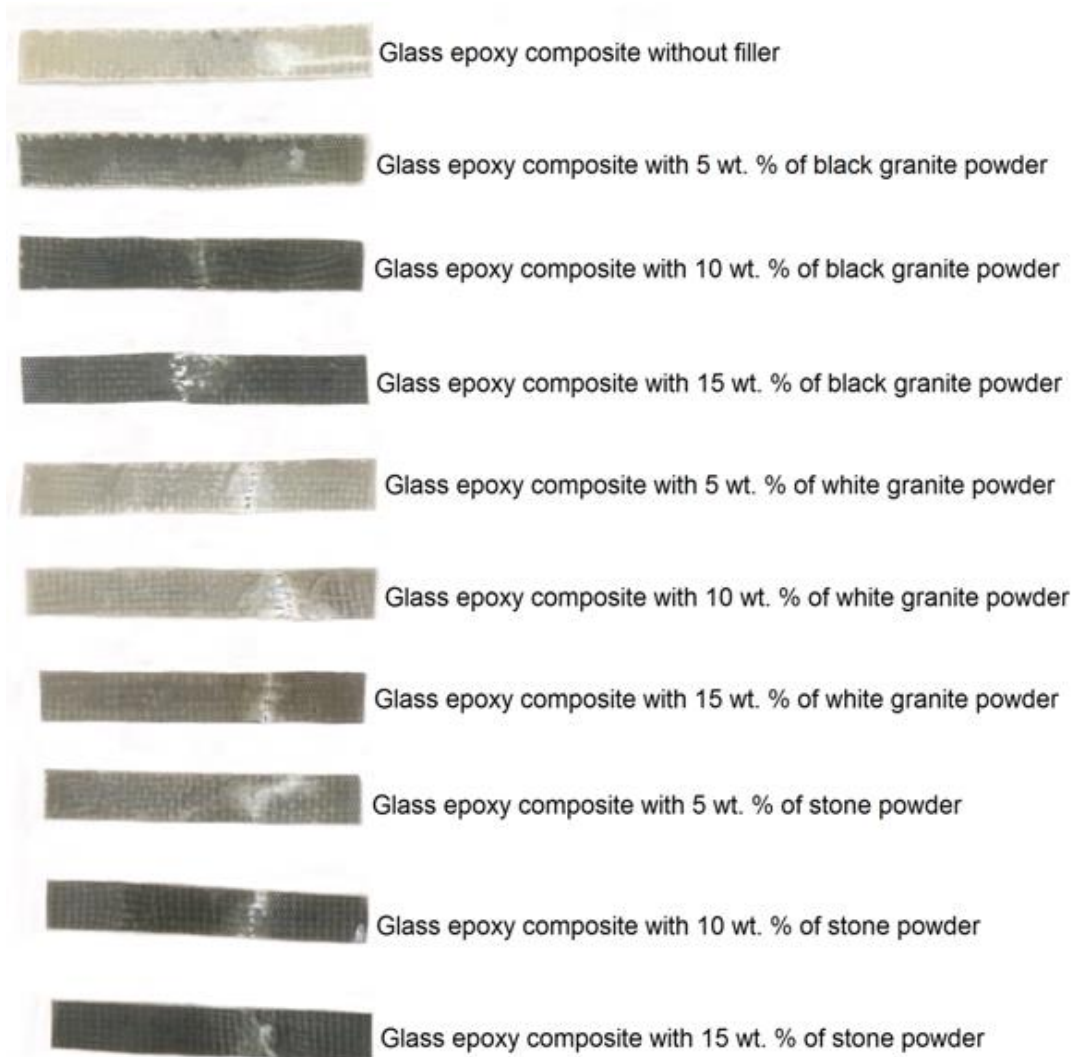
Fractured glass epoxy composite specimens with and without fillers after the tensile test
